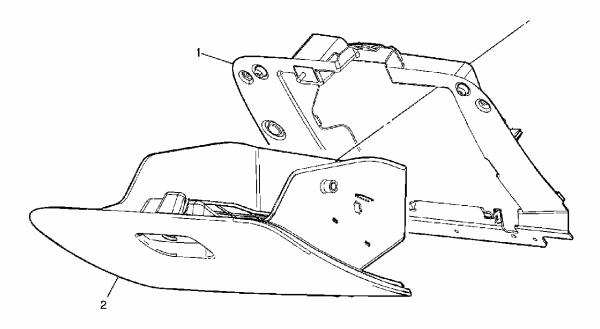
Identifying Instrument Panel Compartment Door Courtesy of GENERAL MOTORS CORP.
